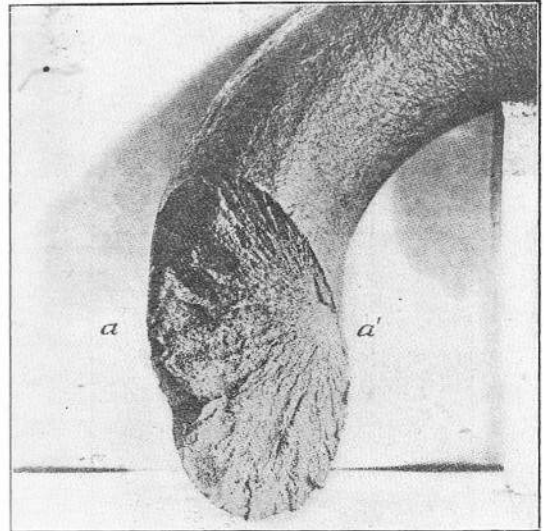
Typical Fracture of Coil of a Heavy Helical Spring.
